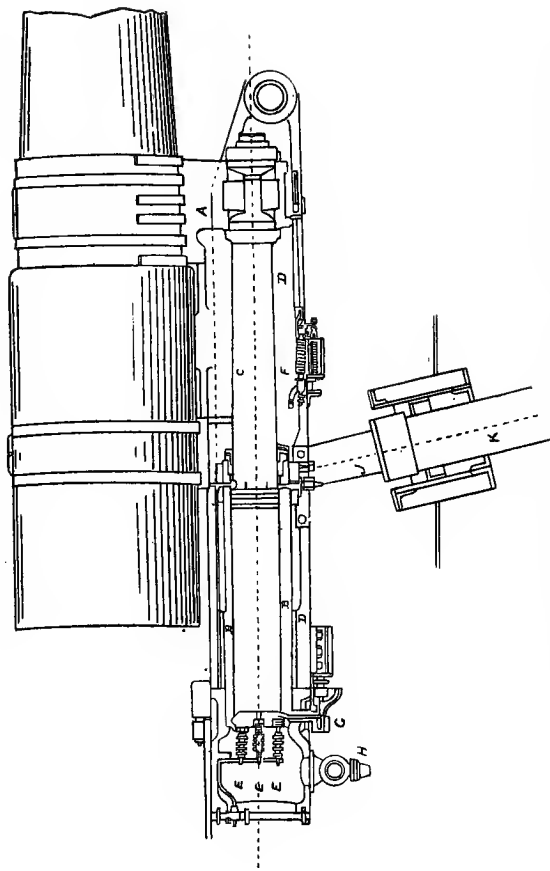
HYDRAULIC MOUNTING FOR TURRET GUN, SHOWING THE RECOIL AND ELEVATING PRESSES.
